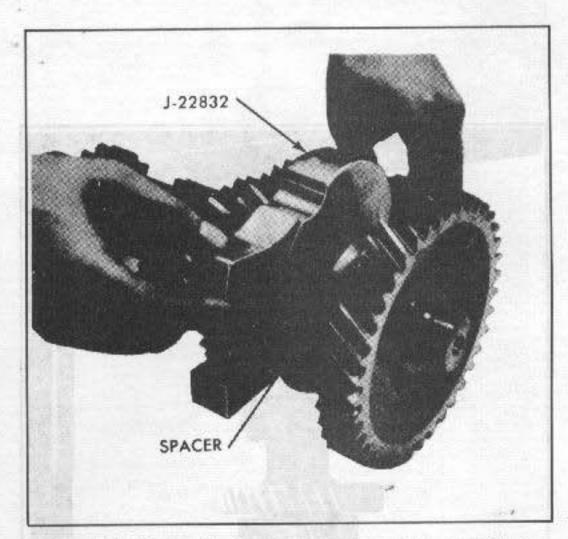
B-20L-Positioning Tool J-22832 on Countershaft
